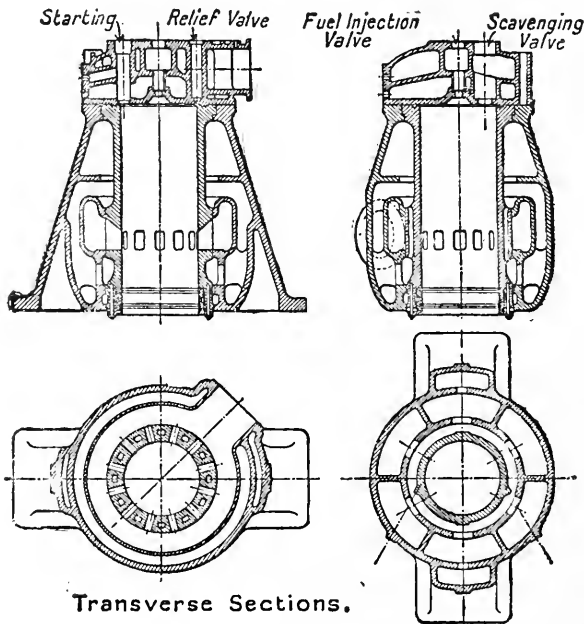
Cylinder and Head of a Two-stroke Single-acting Engine.
